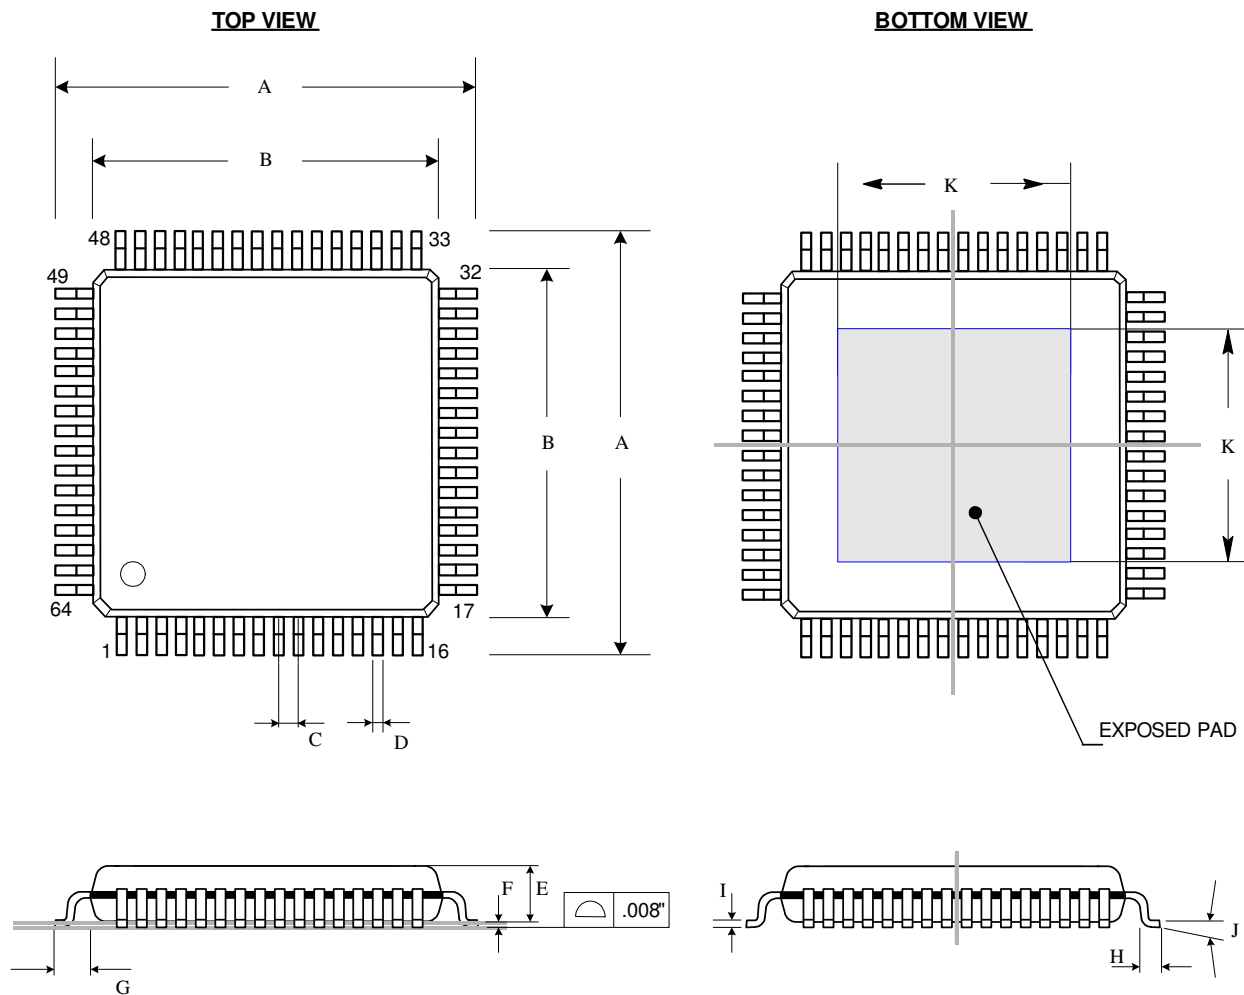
64 Pin LQFP (Exposed Pad) Package
